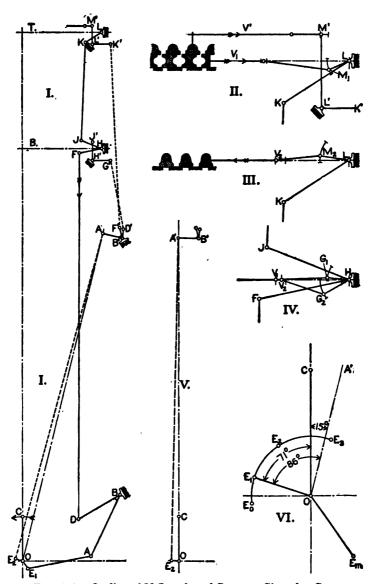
Outline of McIntosh and Seymour Six-valve Gear.
